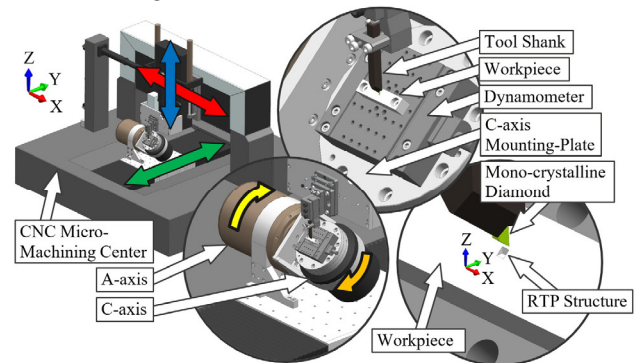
Experimental setup: five-axis micromachining center, tool, dynamometer, and workpiece
